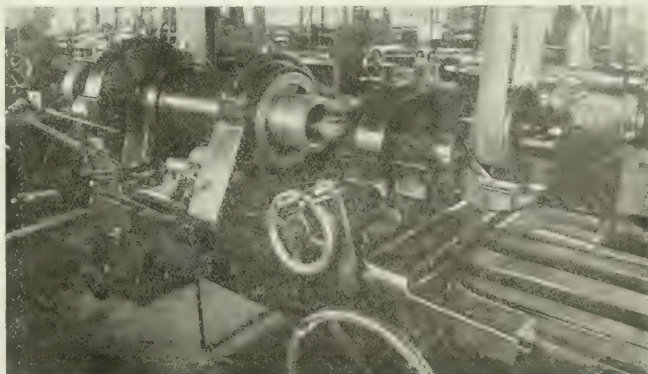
MILLING THREADS IN BASE OF 9.2 IN. SHELL. MACHINE FITTED WITH AIR CHUCK, TRAVELING CARRIAGE AND TWO SPEEDS.
